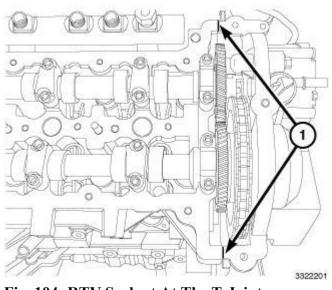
RTV Sealant At The T-Joints Courtesy of CHRYSLER GROUP, LLC
